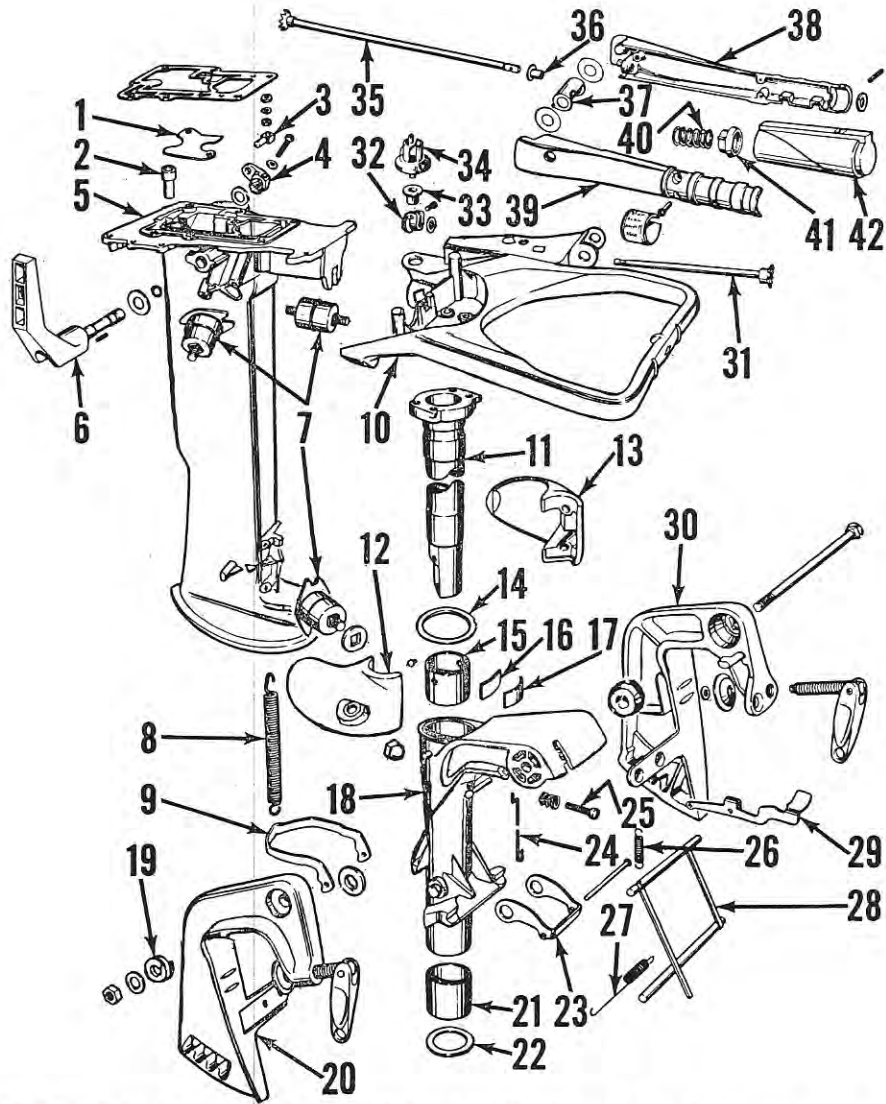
Exploded view of stern bracket, exhaust housing and associated parts used on 5D17 and later models.
